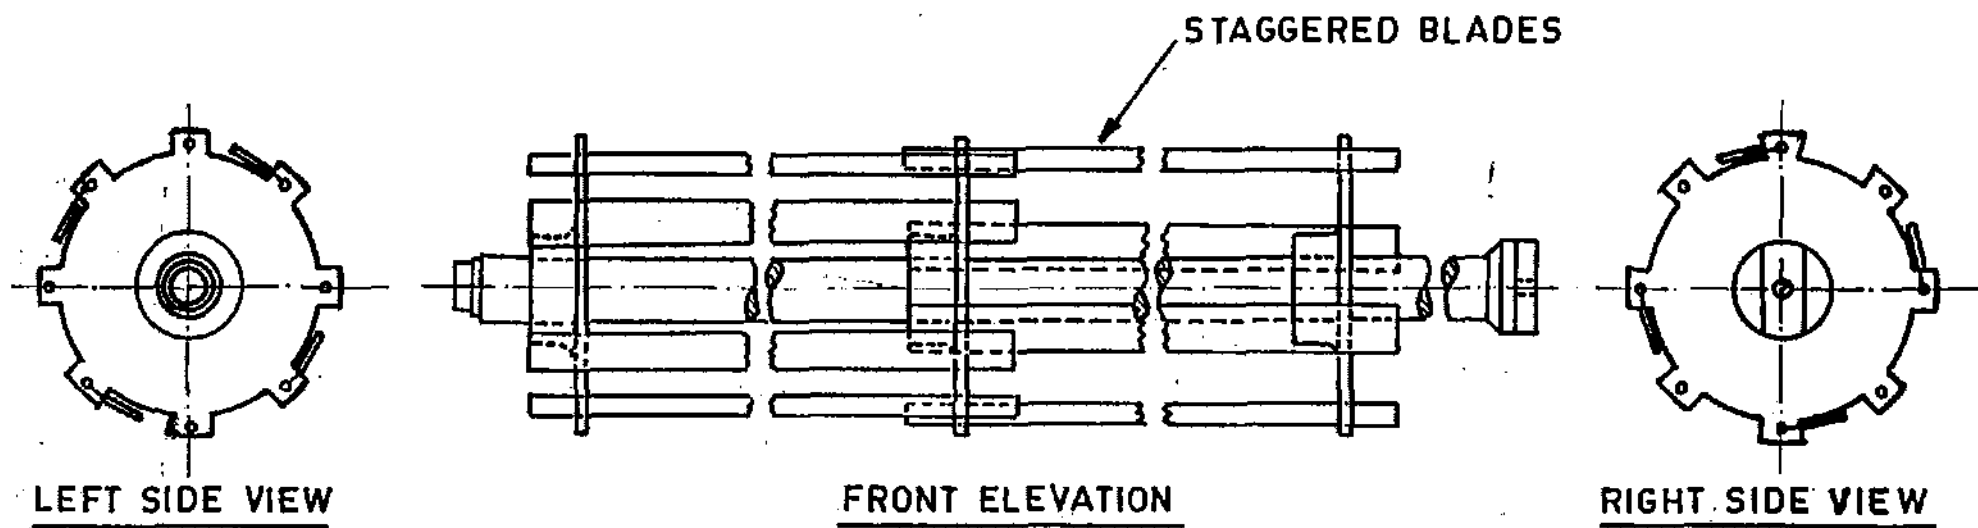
CONFIGURATION OF ROTOR WITH STAGGERED BLADES
